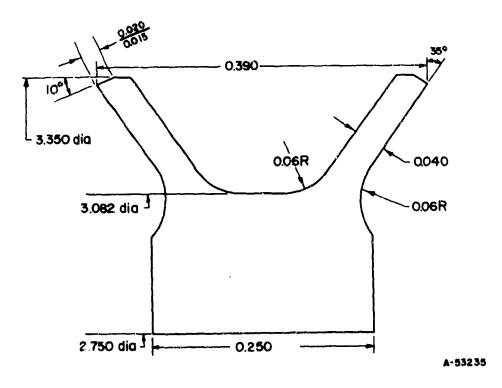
PRELIMINAR, DESIGN OF 3-INCH SEAL
